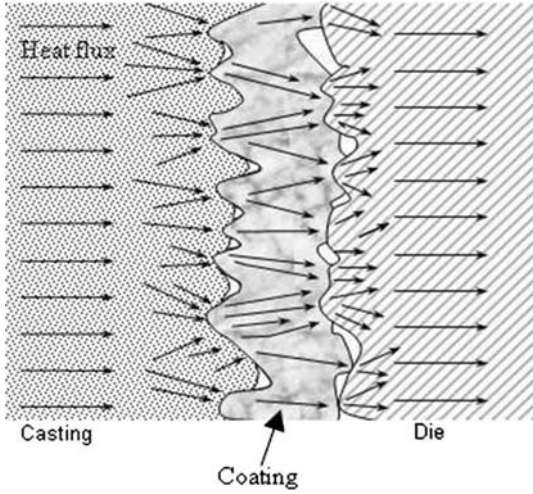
Three components of the casting-mold interface (casting-coating, coating, and coating-die interfaces) in permanent mold casting and the heat flux density while crossing this interface.
